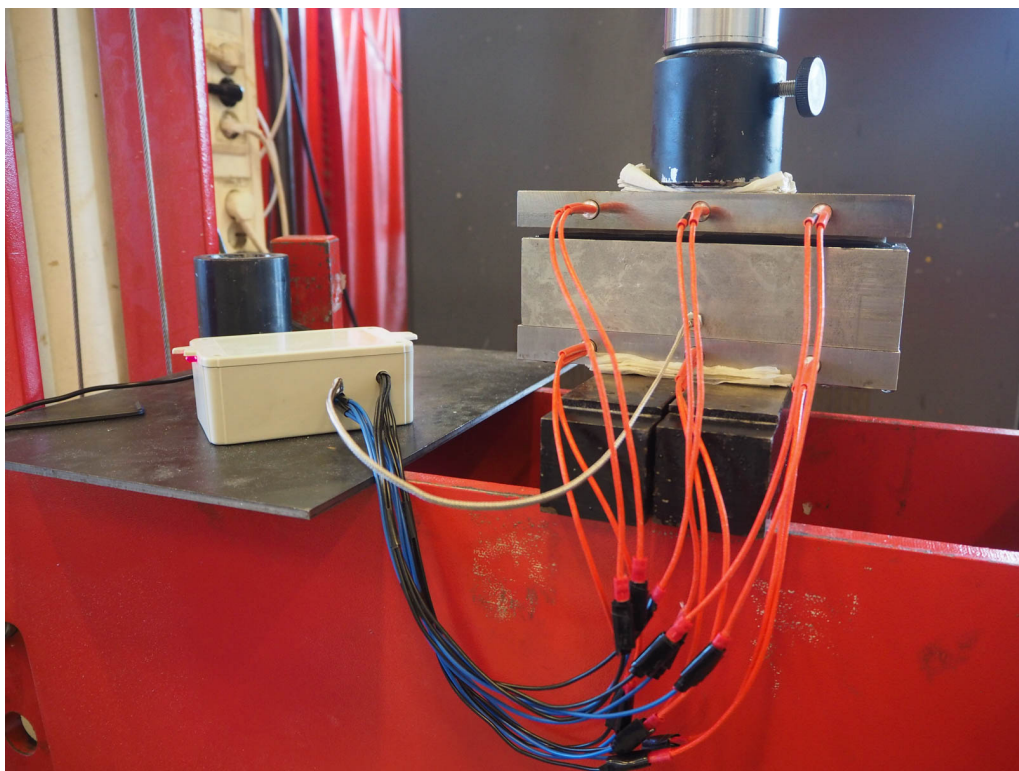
Moulding setup: After the pulp has been filtered down into the mould, the bottom is attached and the male mould half is inserted. The mould is then placed in a hydraulic press and a temperature sensor and six 250 W heating elements, controlled by a PID controller, is inserted to heat the mould.
